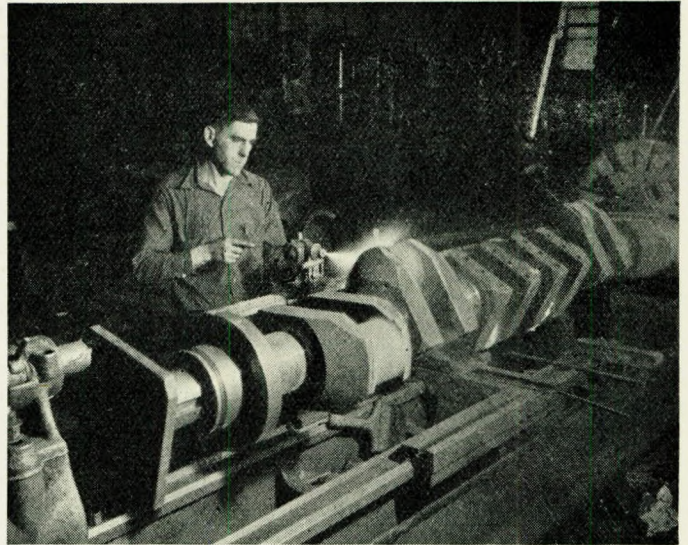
Metallizing journals of Diesel engine crankshaft
